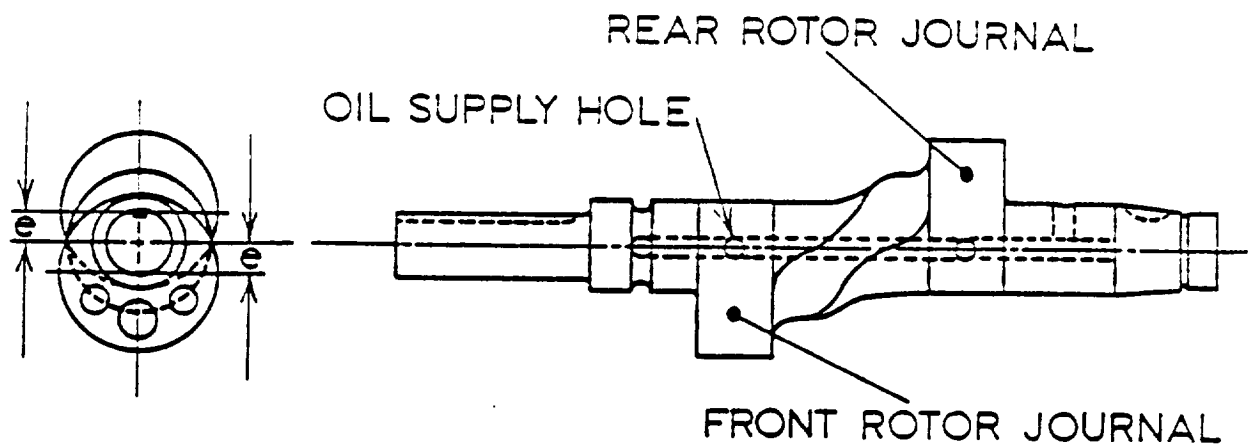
Side and end views of shaft and rotor showing basic engine dimensions.
